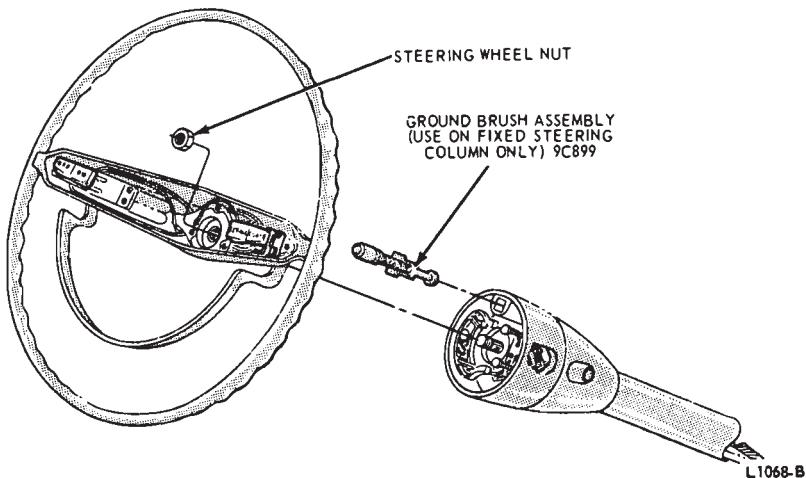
Steering Wheel Installation—Ford, Mercury and Meteor
